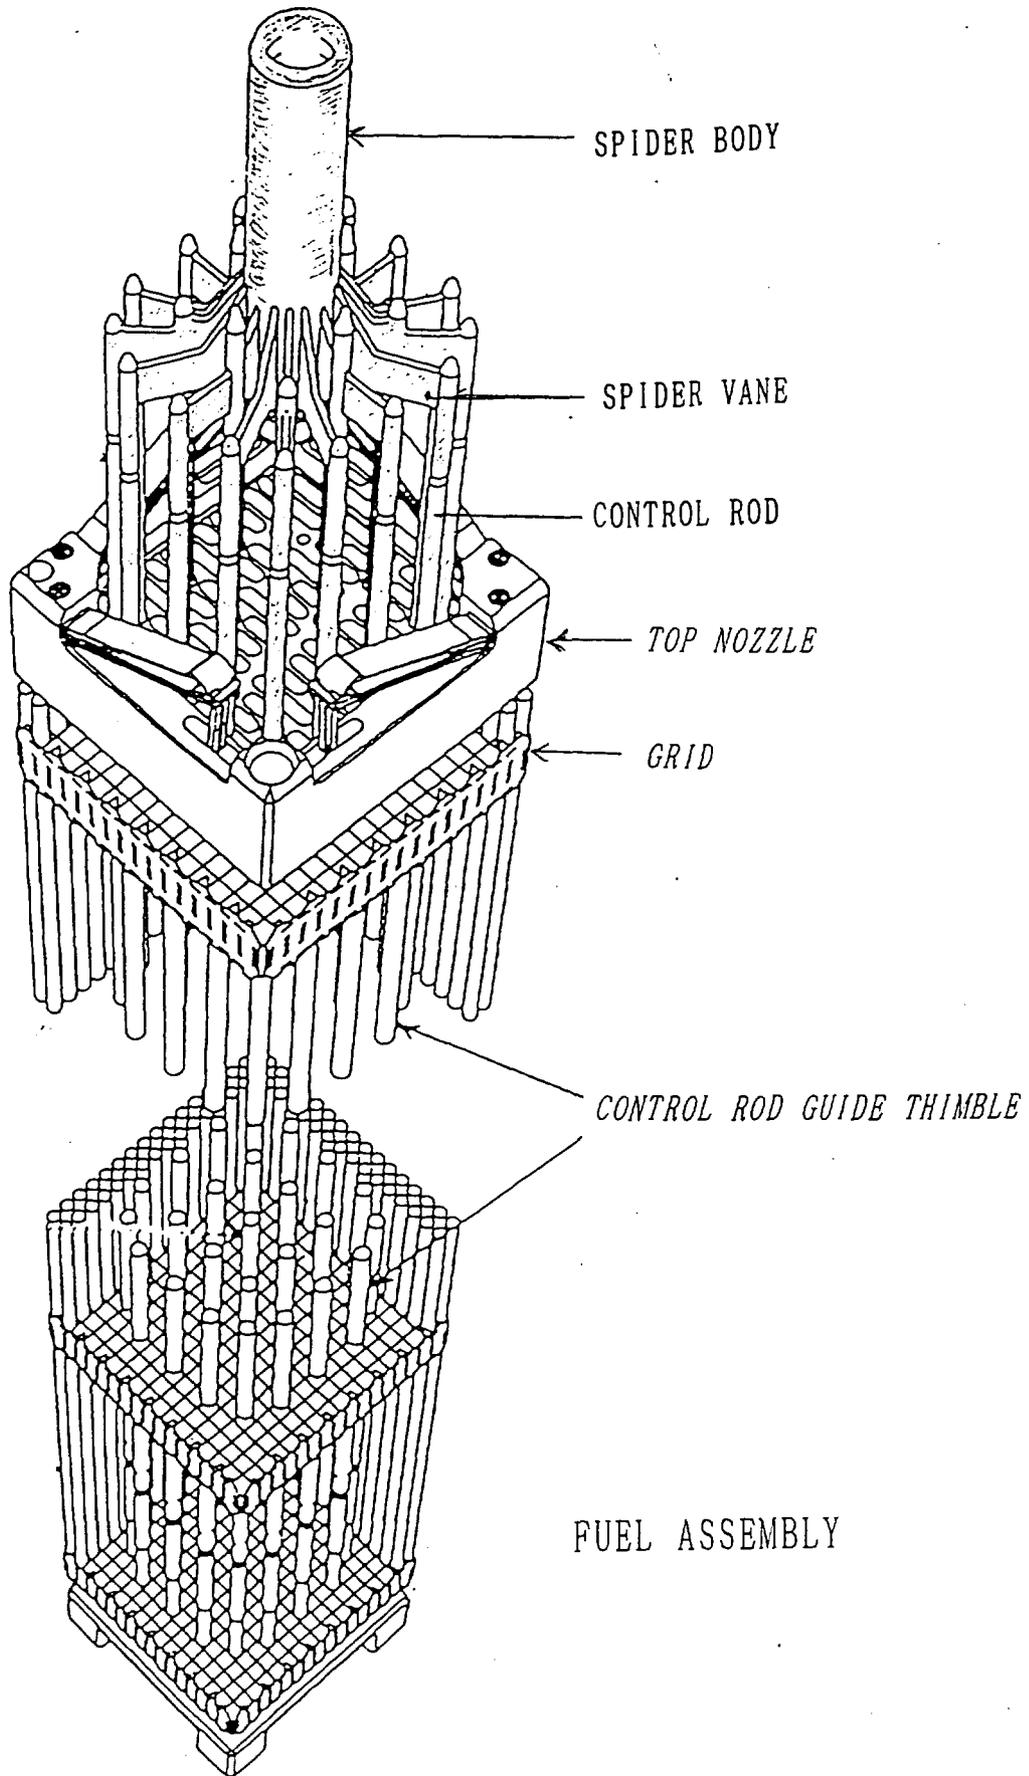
FUEL ASSEMBLY AND CONTROL ROD CLUSTER
